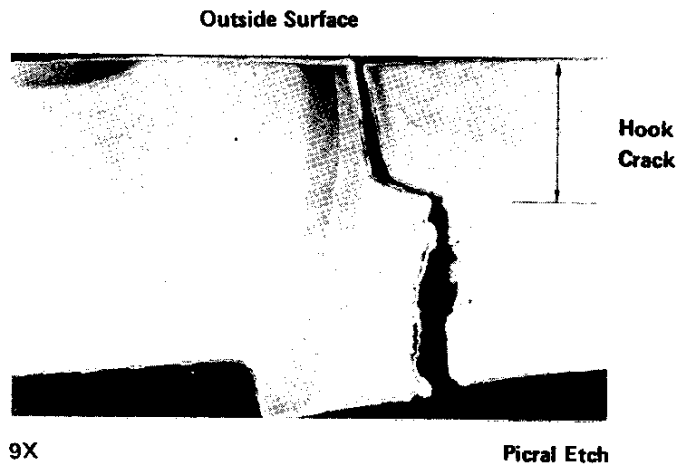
Appearance of a hook crack in ERW weld<sup>2</sup>
